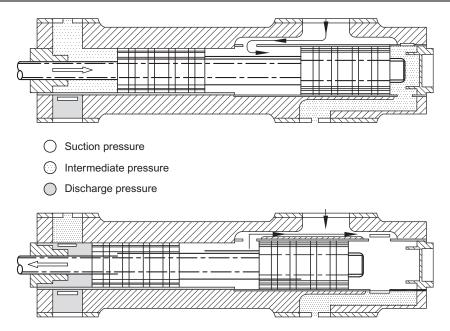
Cutaway of a stepped-piston cylinder.
